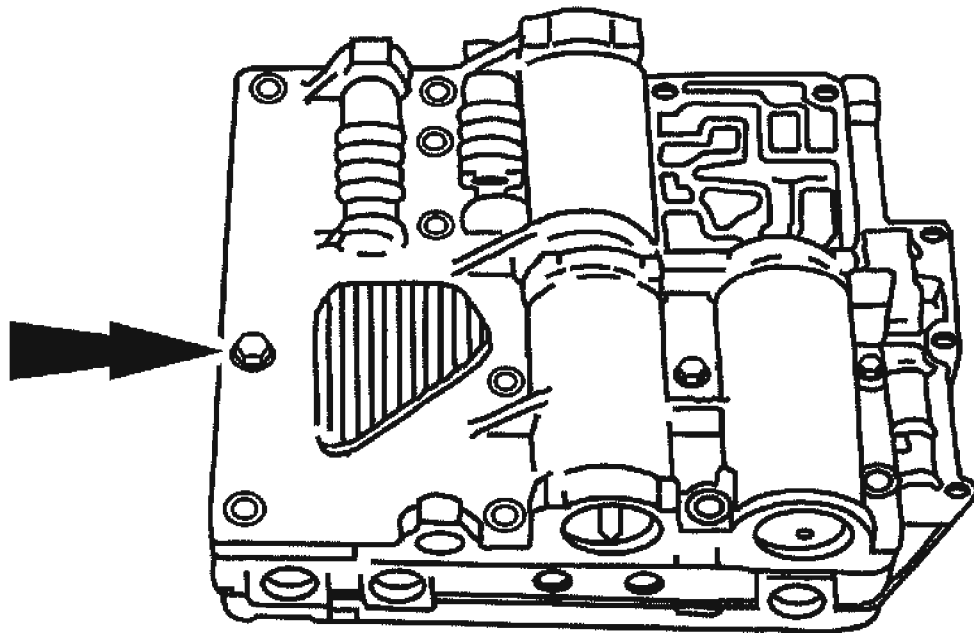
Installing Accumulator Body Separator Plate And Gaskets
